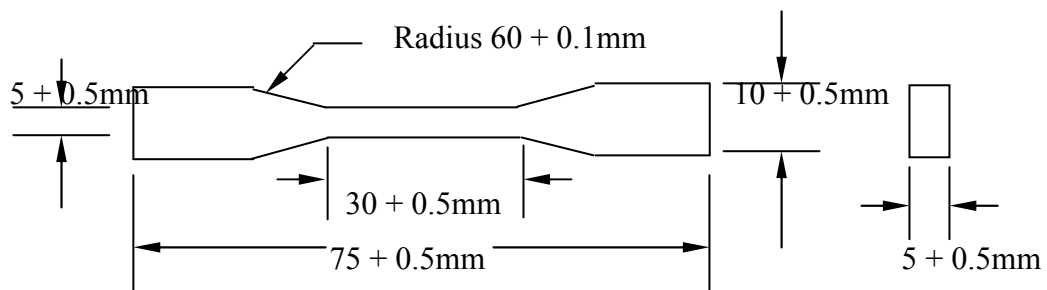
Layout of matrix sample for tensile testing based on ASTM Standards D638
